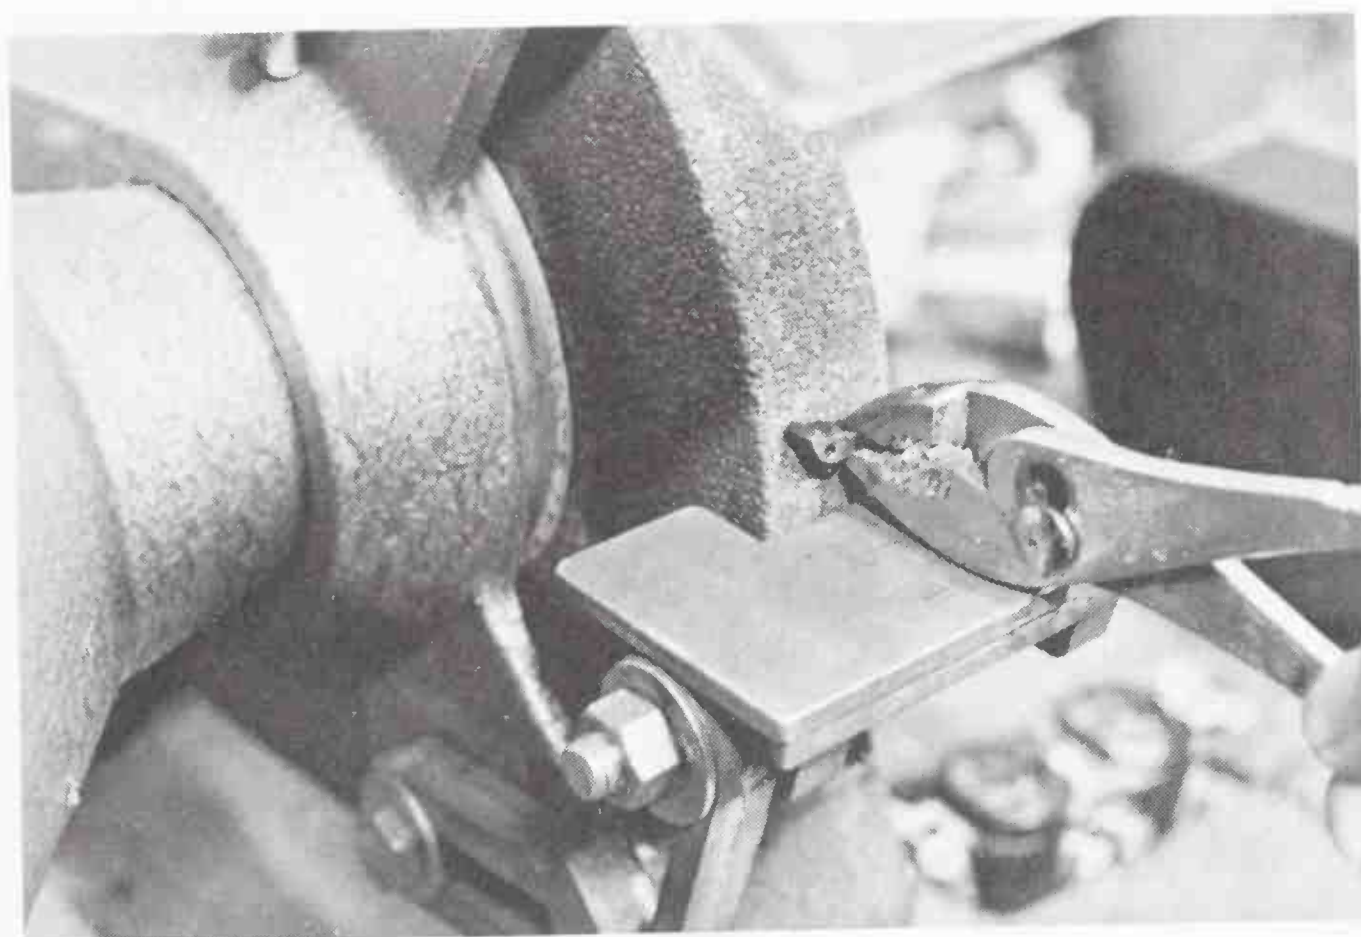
A bench grinder removes a lot of metal quickly and is excellent for such purposes prior to final finishing.
